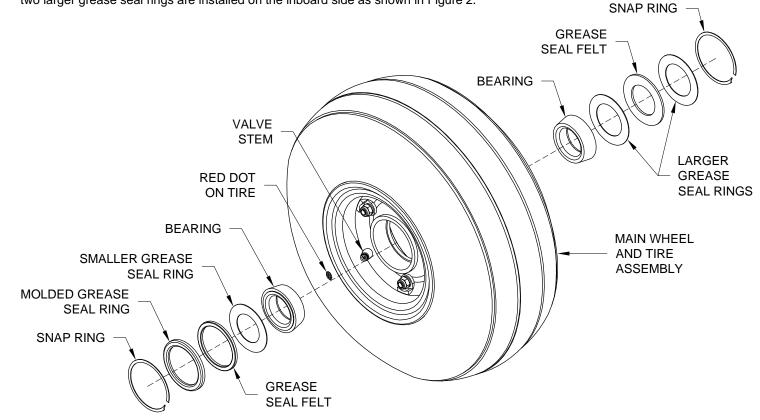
INSTALLING BEARINGS IN THE MAIN WHEEL AND TIRE ASSEMBLY
